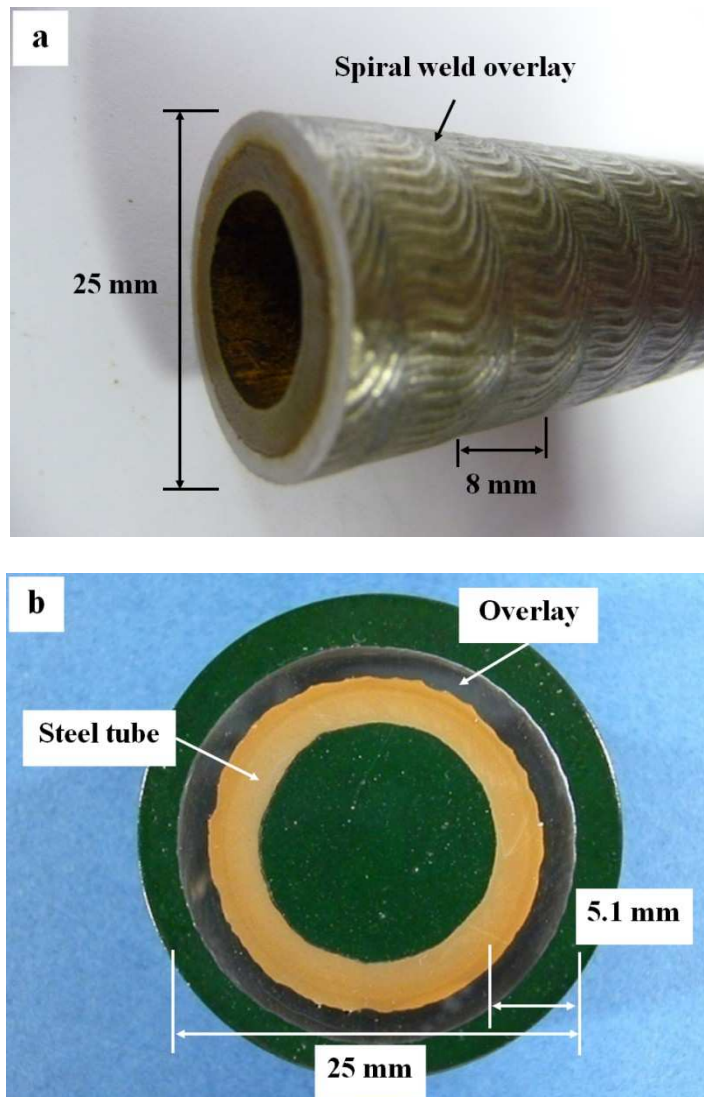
Showing (a) the weld overlaid tube and weld bead specifications, (b) the whole cross sectional sample of the tube.
